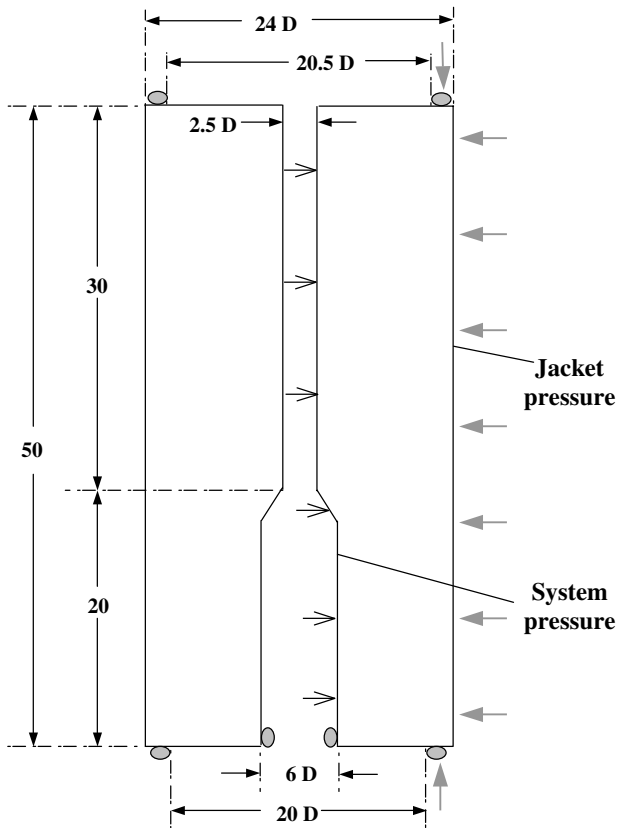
Schematic of CCPG-537 cylinder showing nominal dimensions, pressure loading and seal locations. The engagement region with piston extends from the top surface downward to 30 mm. All dimensions are in millimetres.
